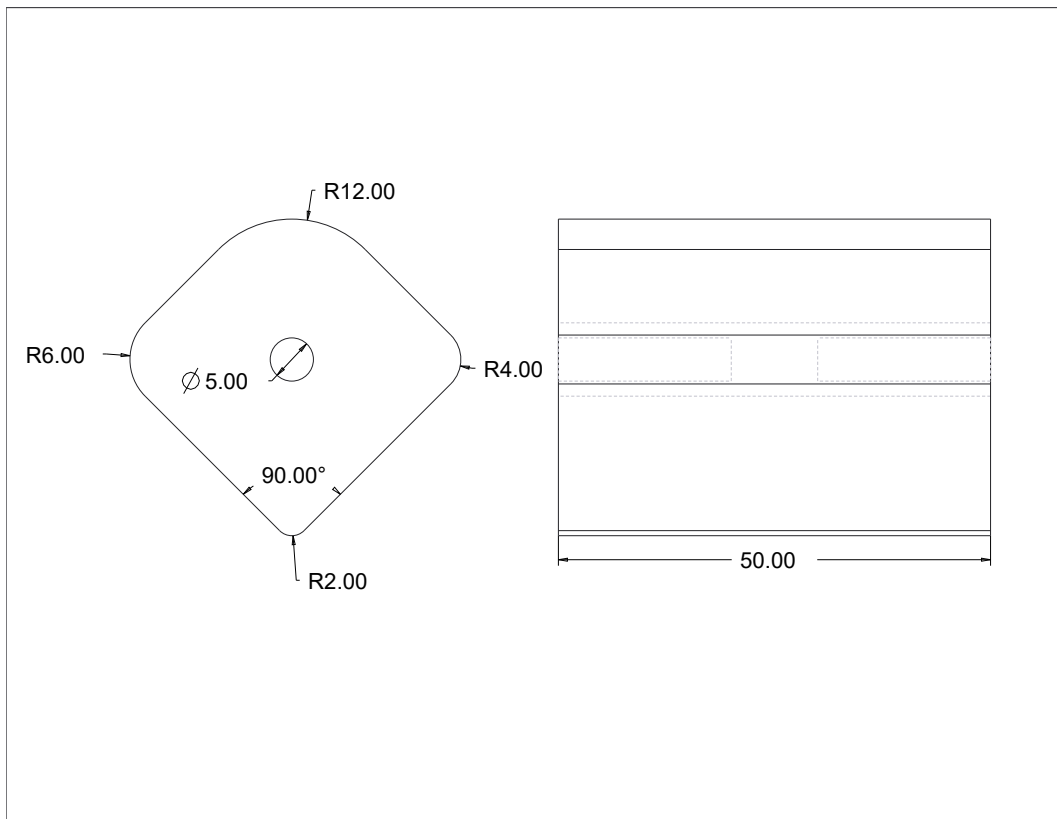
Top Tool with four different tool radius (dimensions are in mm)
